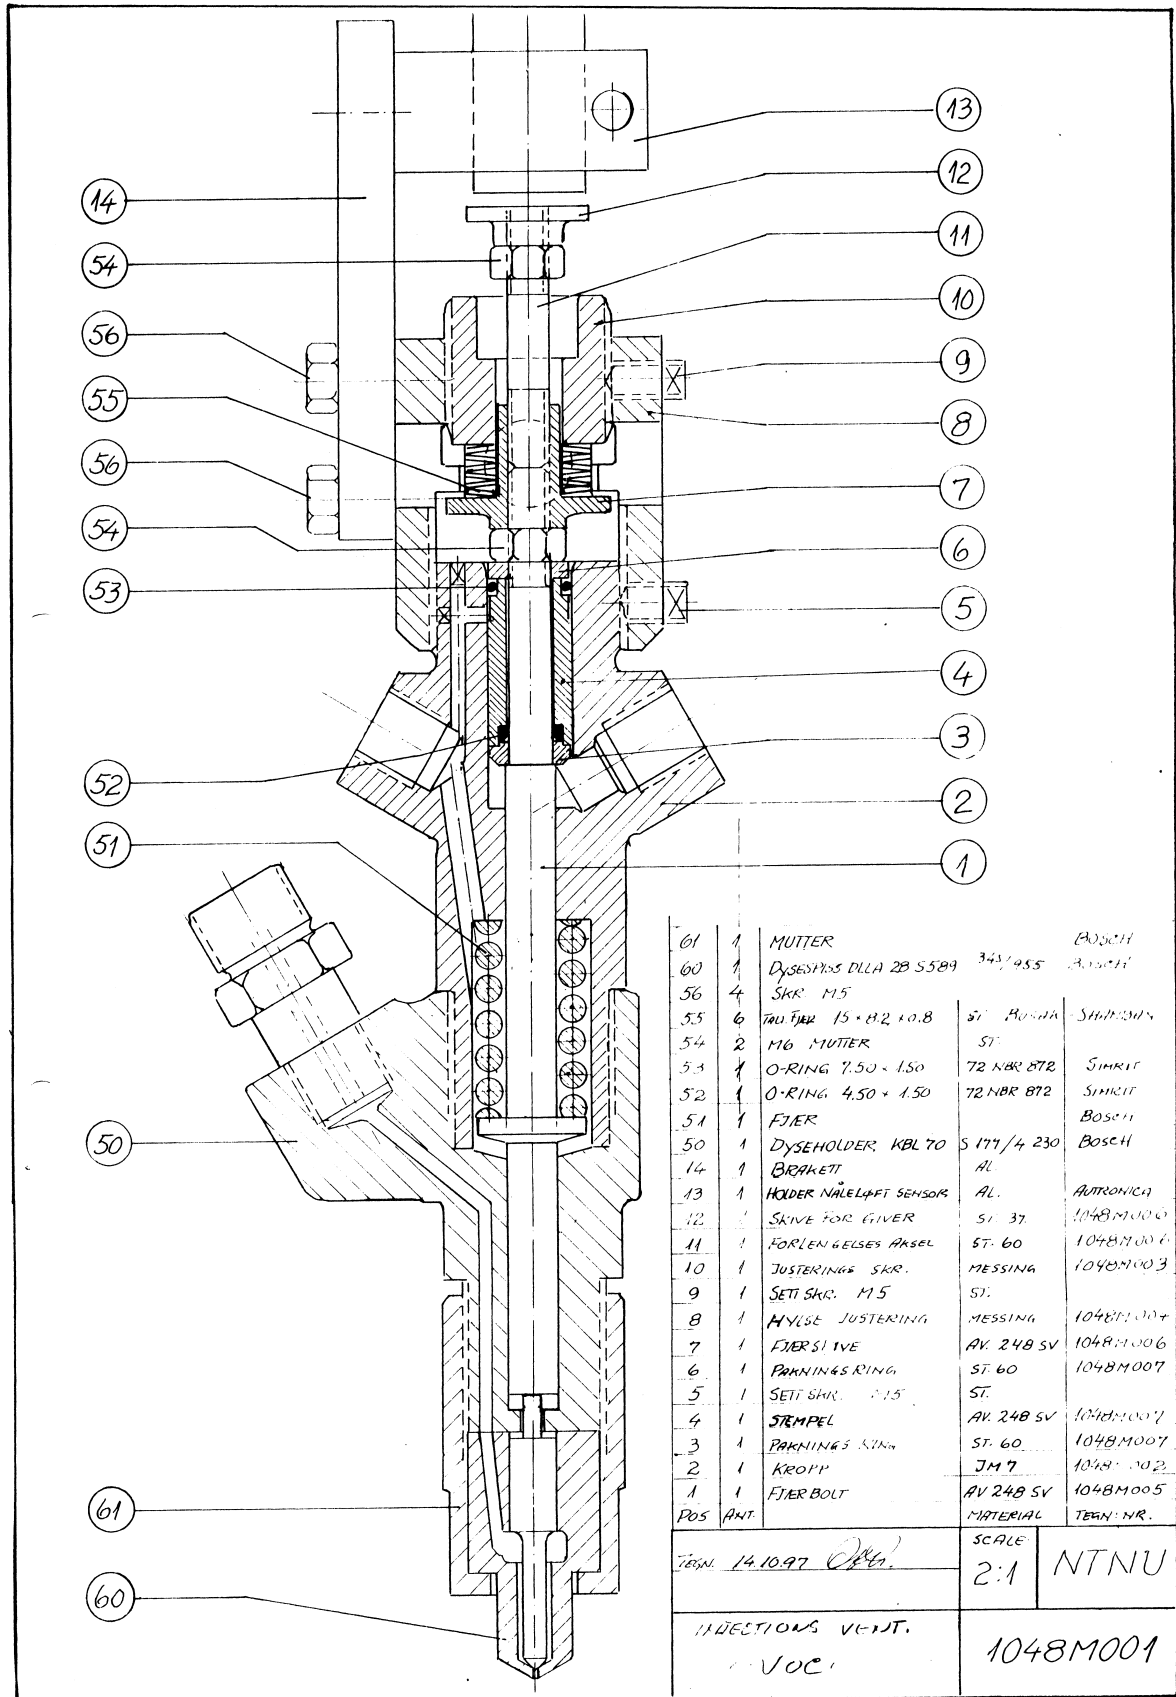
Sectional drawing of the VOC Fuel single hole injector.
